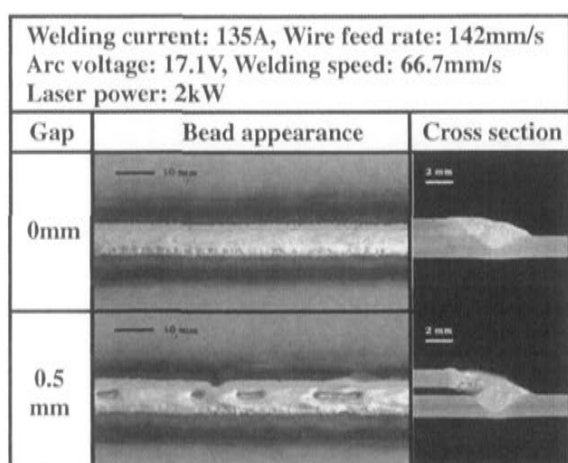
Laser beam and DC pulsed MIG arc hybrid welding at a speed of 66.7 mm/s (Wire: A5356, 1.2 mm dia. Base metal: A5052, 1.2 mm/1.5 mm)
